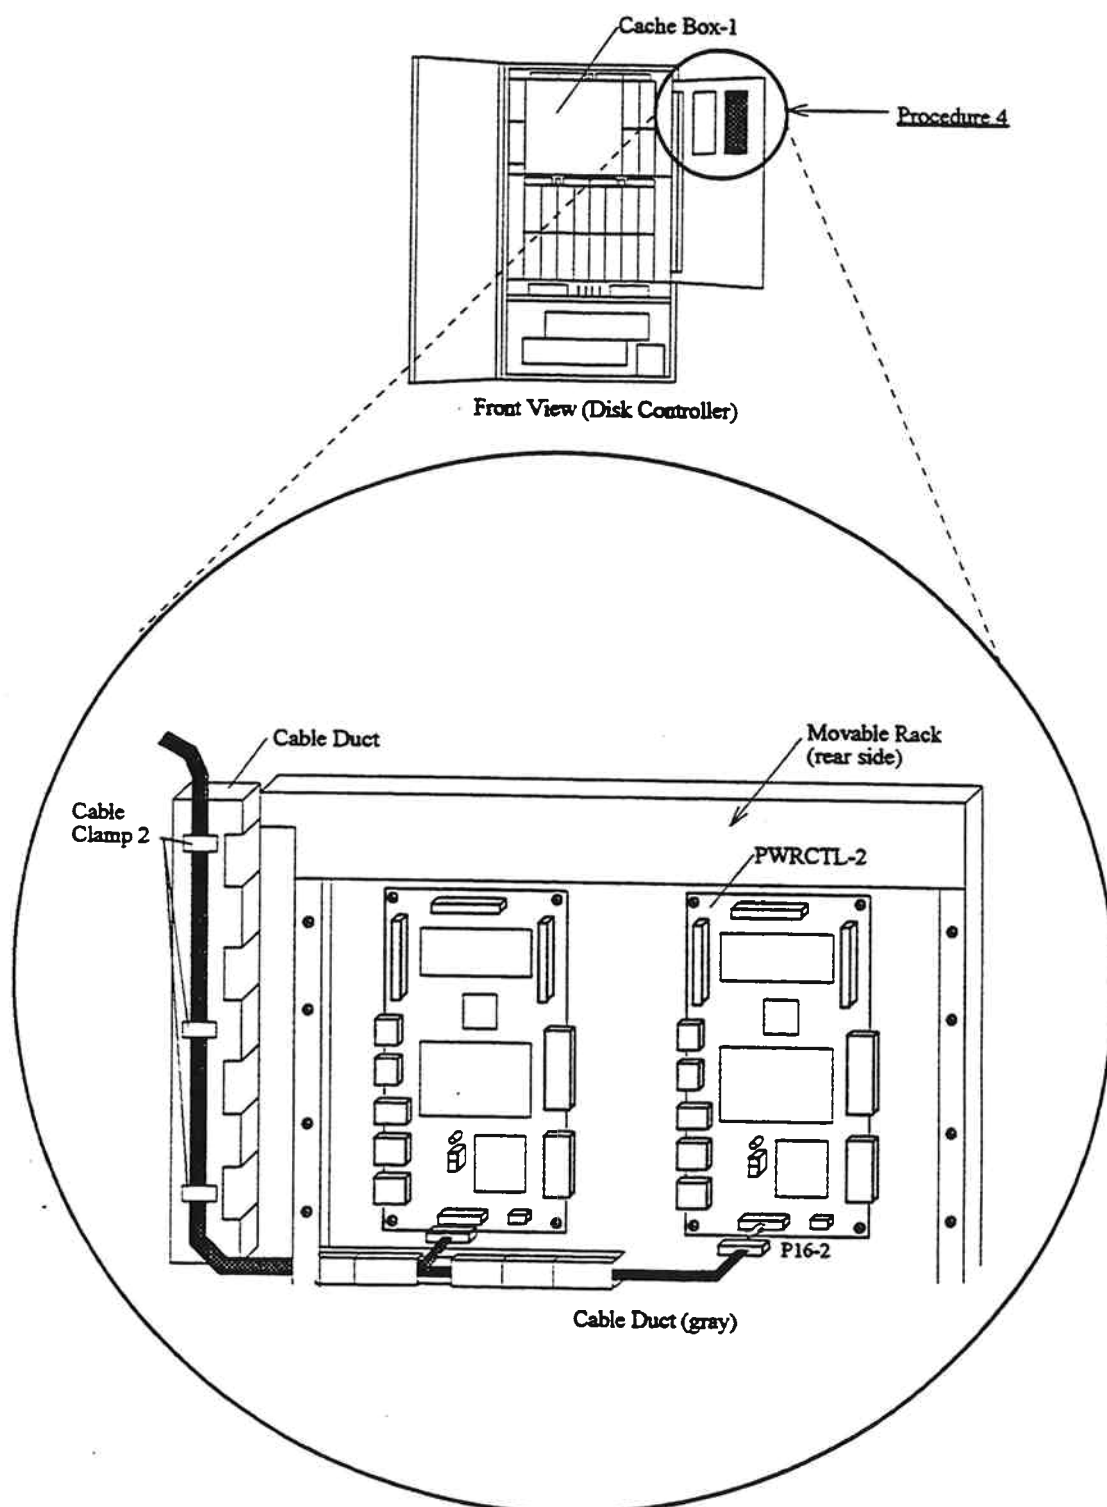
Disconnection of the Cables
